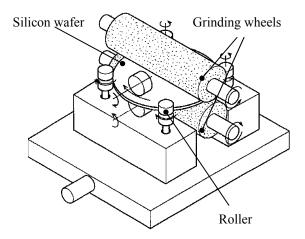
Horizontal machine configuration for silicon wafers using cylinder-shape grinding wheels (after [50]).
